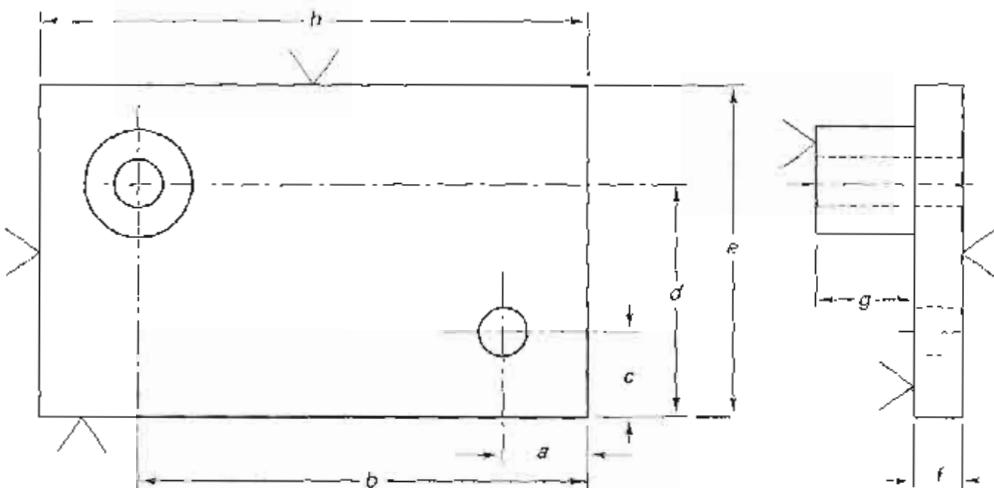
Drawing of a plate showing locating dimensions (a, b, c, d) versus sizing dimensions (e, f, g, h).
